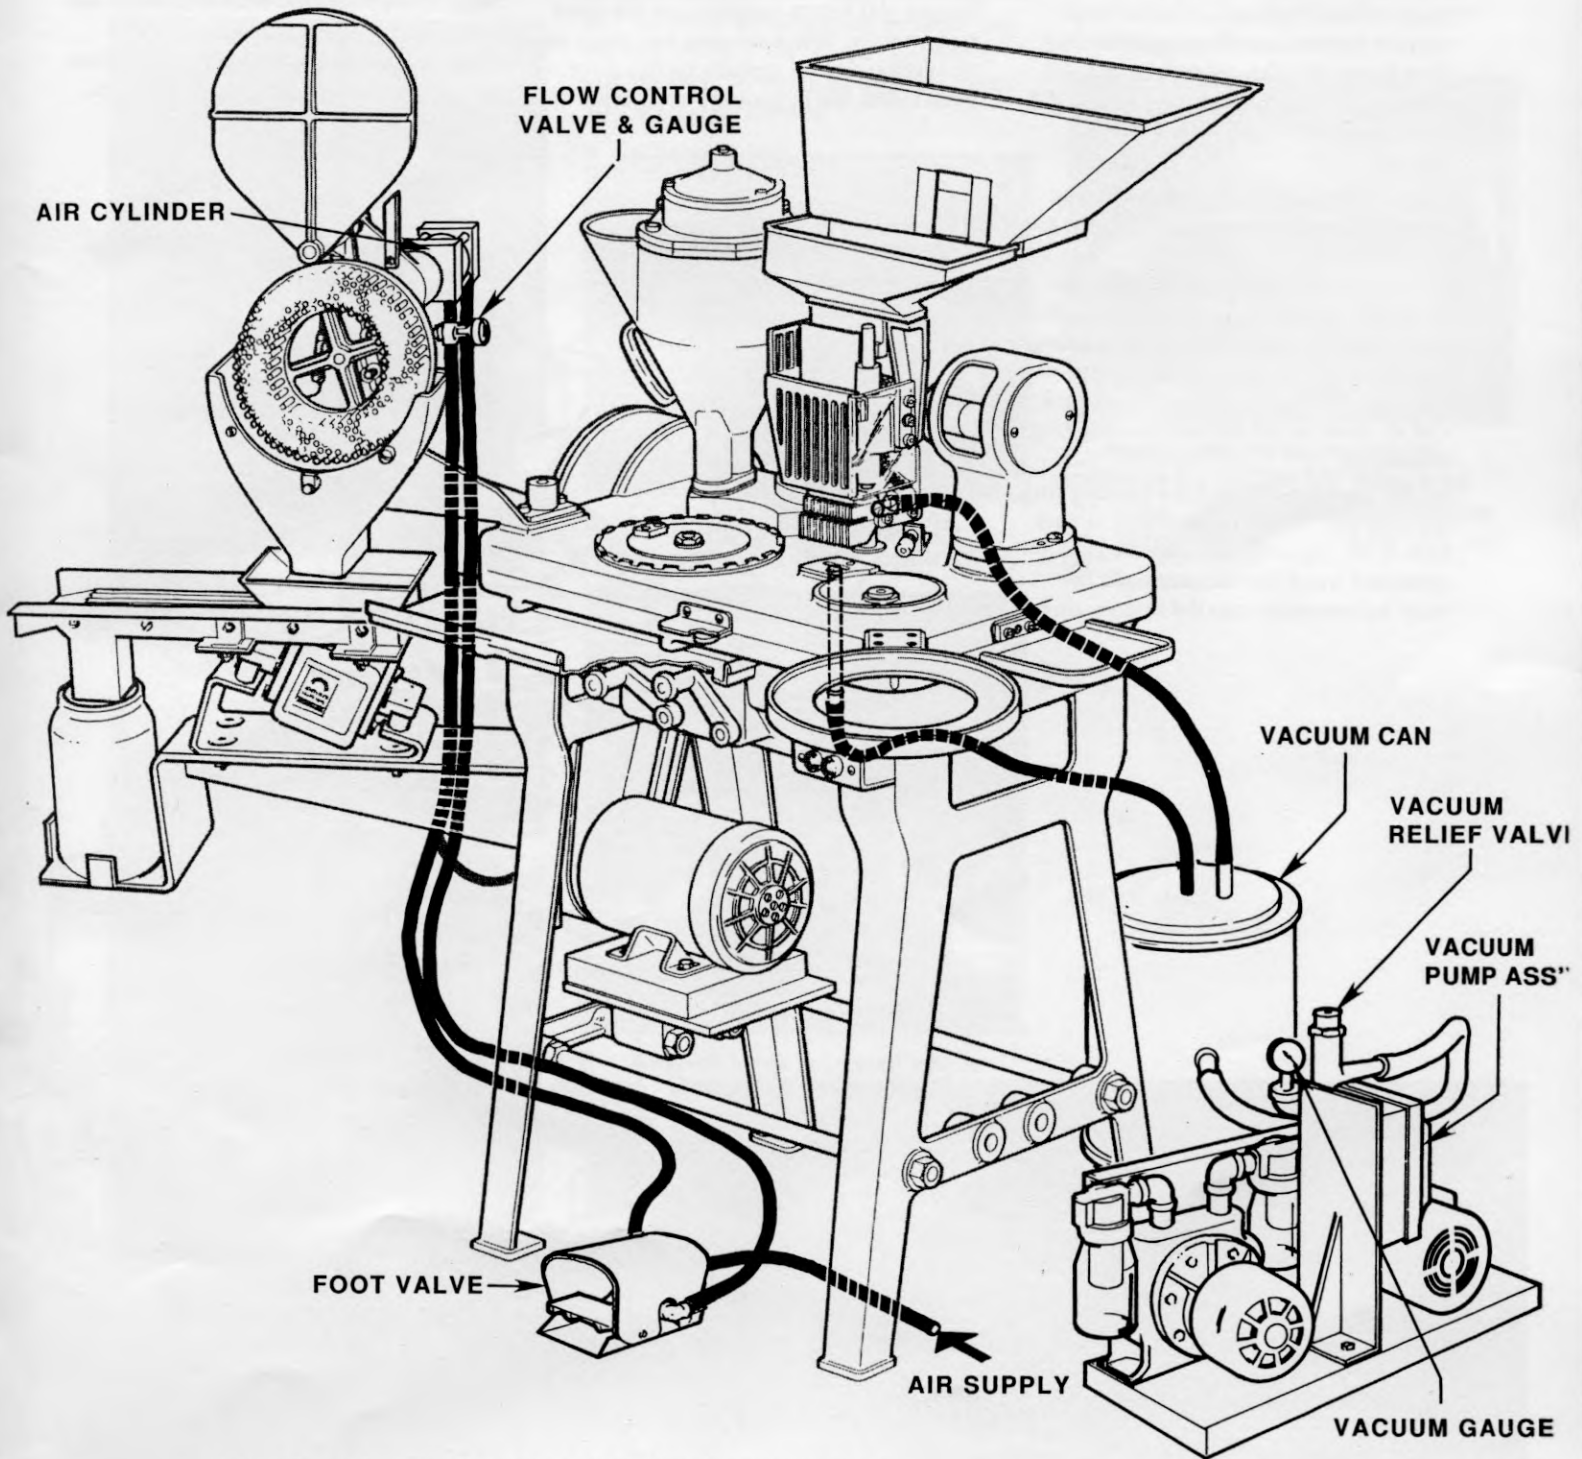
A - TYPE 8 VACUUM ASSEMBLY HOOKUP
